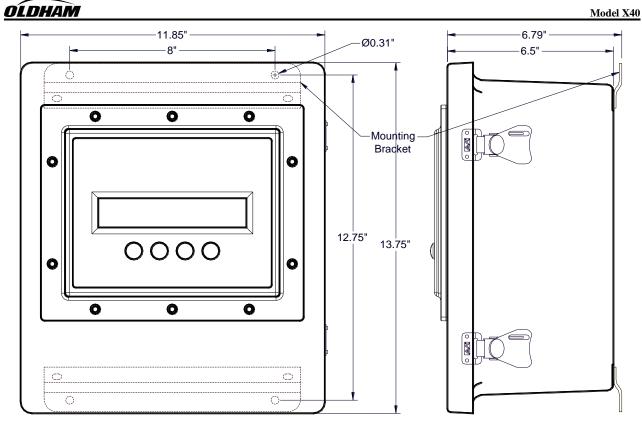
MX40-08-N4X Controller Mounting and Dimensional View
